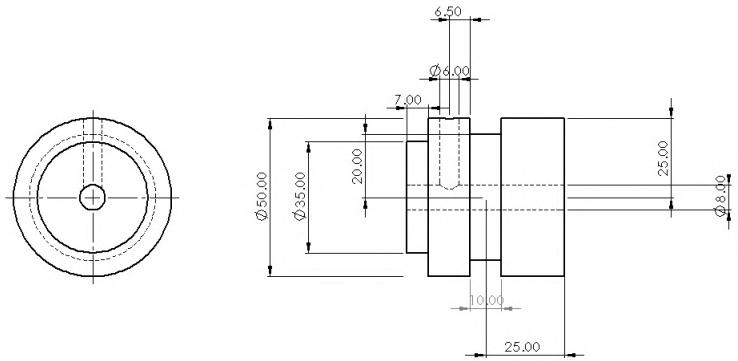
2D Drawing of the small pulley (All dimensions are in mm)
